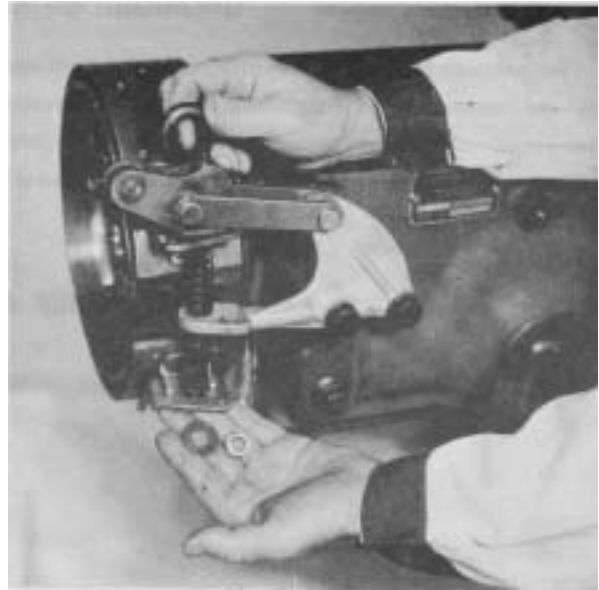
Remove adjusting bolt, nuts, and washer. Remove adjusting bolt.
